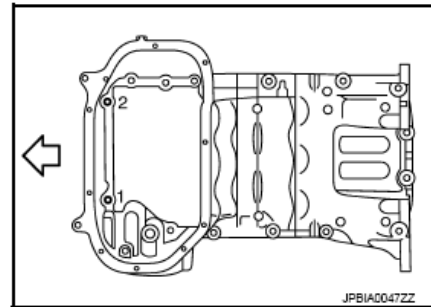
Identifying Tightening Sequence Of Lower Oil Pan Mounting Bolts
